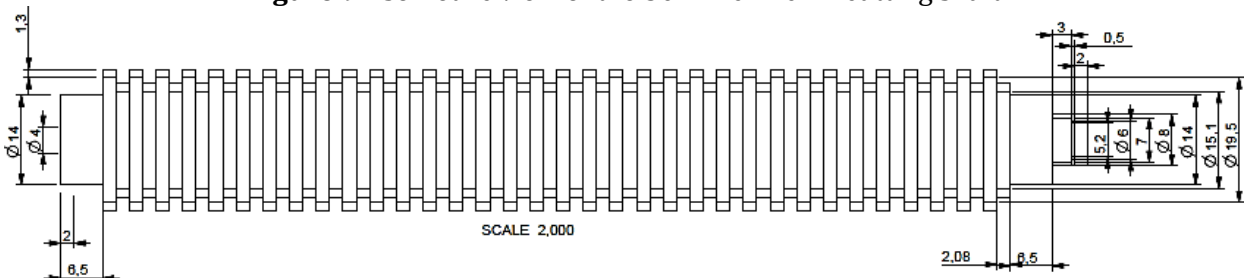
Sectional view of the 30mm chinchin cutting shaft
